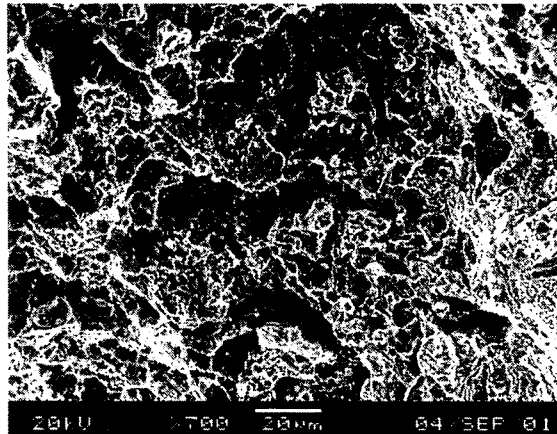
Fracture morphology of traverse cracking area in weld metal
